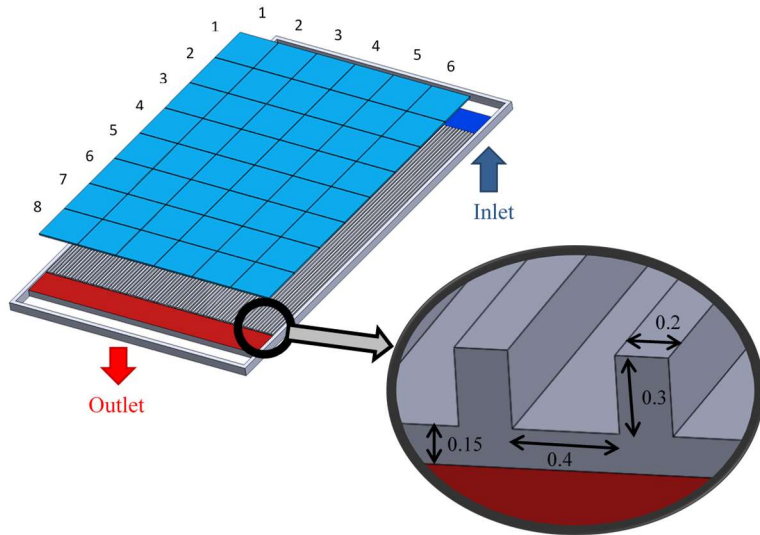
Exploded view of the dense array CPV receiver and the microchannels cooling device. dimensions in mm.
